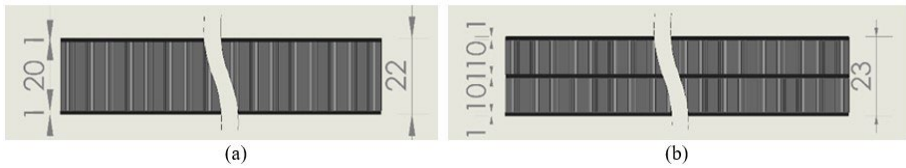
Core and surface height dimensions of composite sandwich samples (a) Single layer; (b) Two layer.
